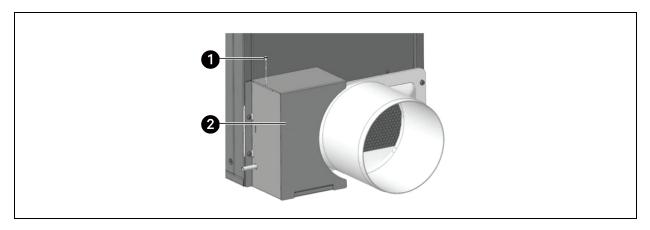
Connecting the L-Shaped Pipe and the Reservoir
